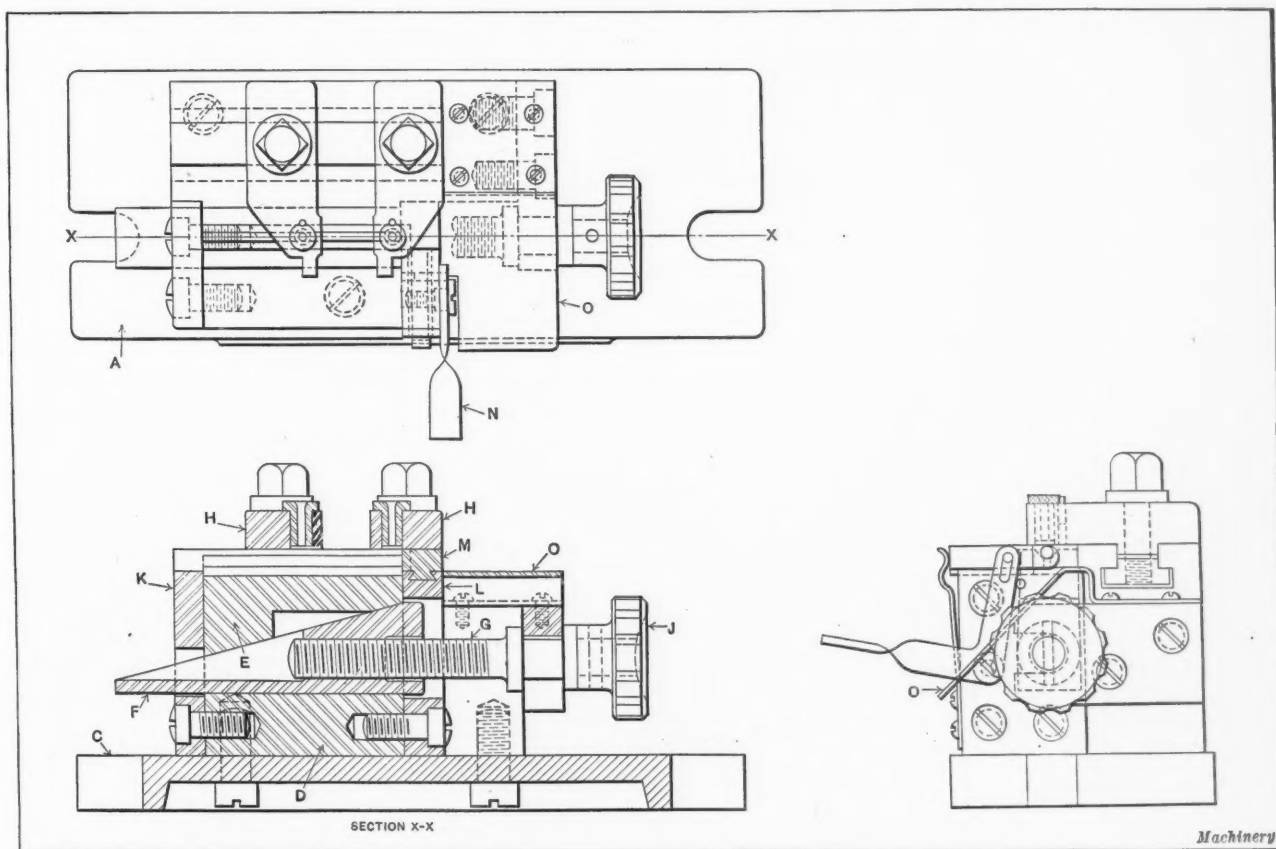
Jig for drilling Cotter-pin Holes in Pins of Various Kinds and Sizes
